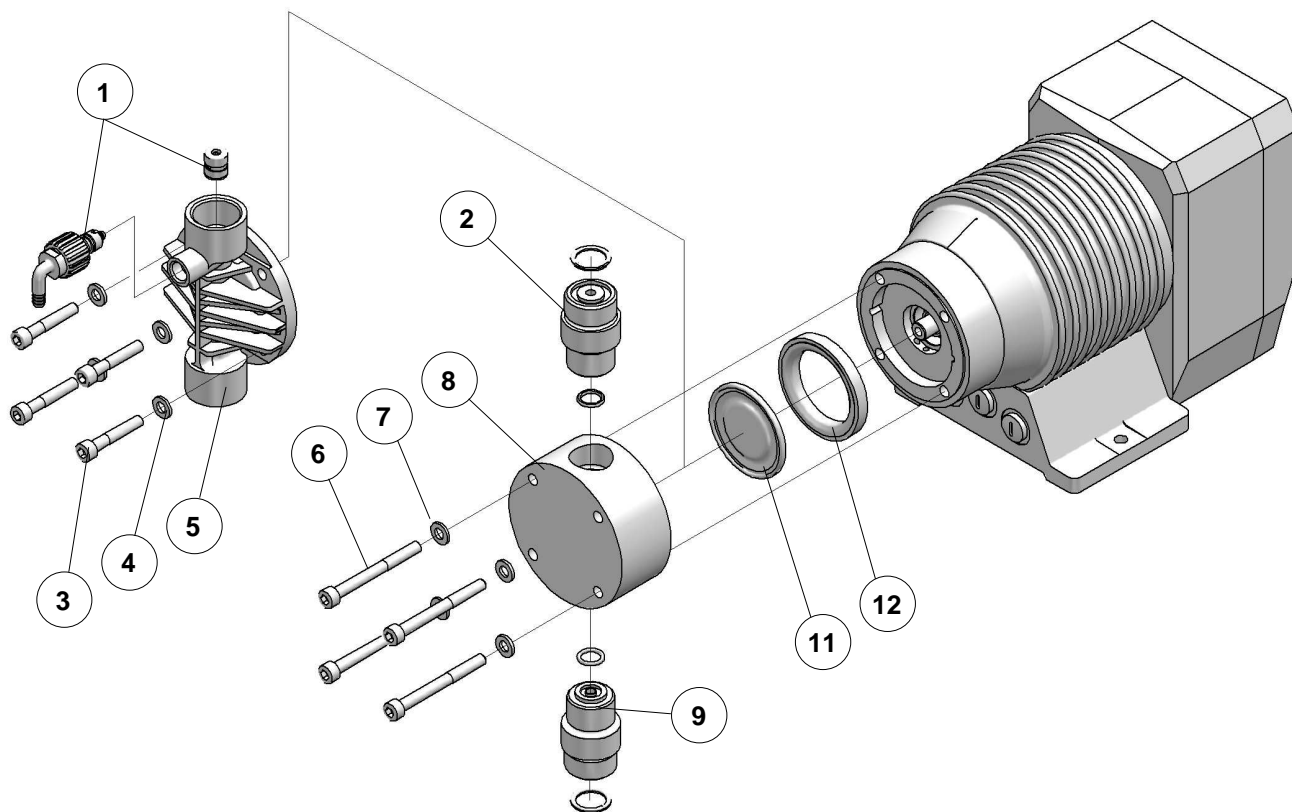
Spare- and wearing parts R 204.1-0,4e ... -14e
